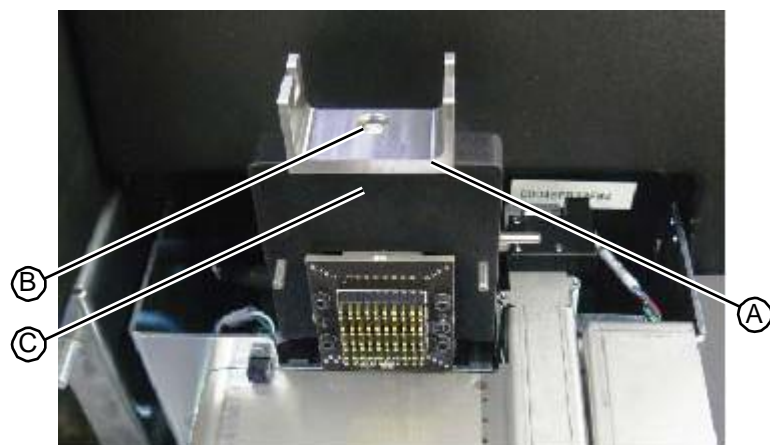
Mounting hole and locating pins on top of test fixture mount
